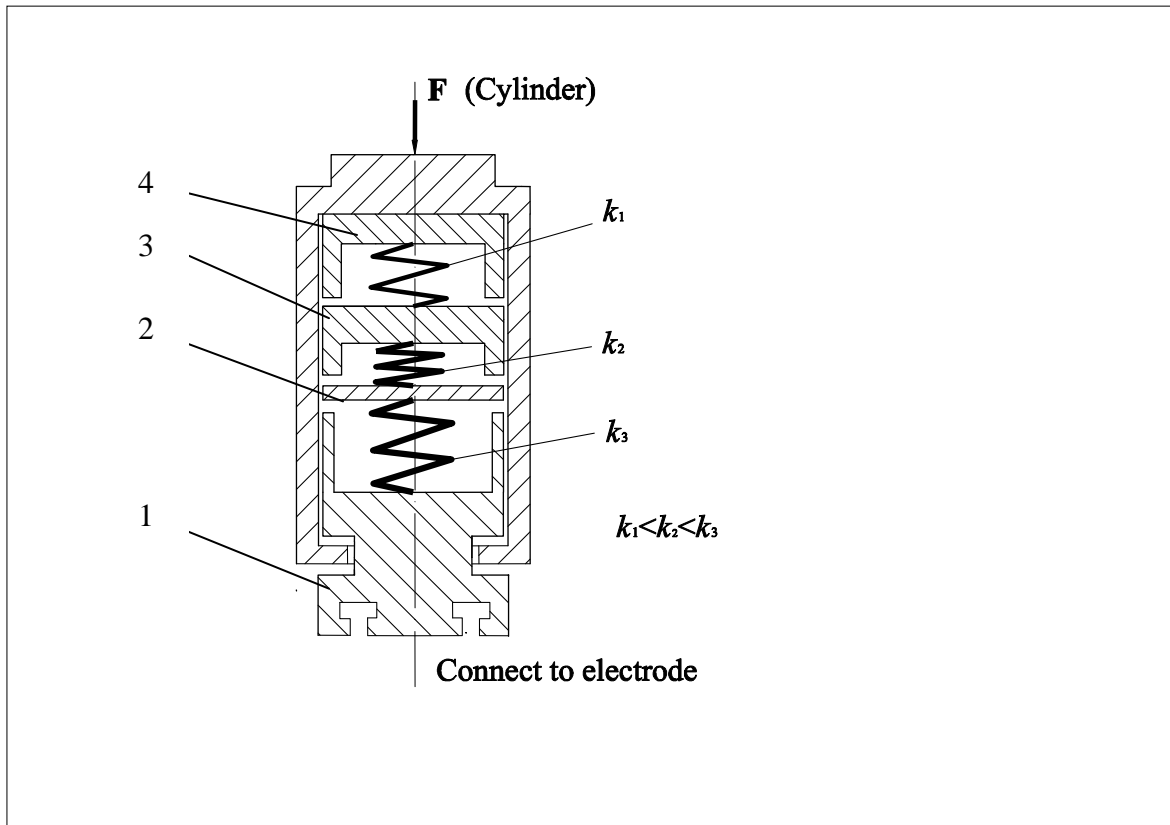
Sketch of welding head with additional springs for EXPERT-DC-inverter
